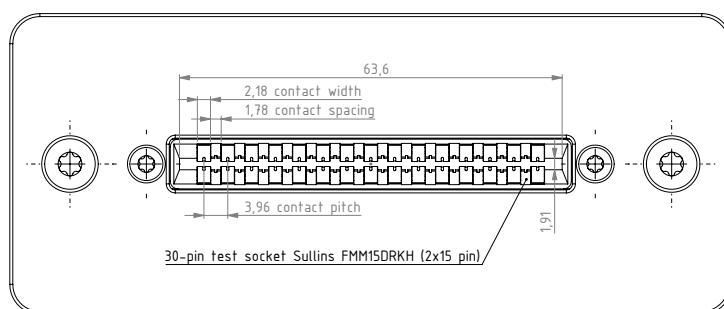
Socket replacement carrier type 1. Dimensions in [mm].
